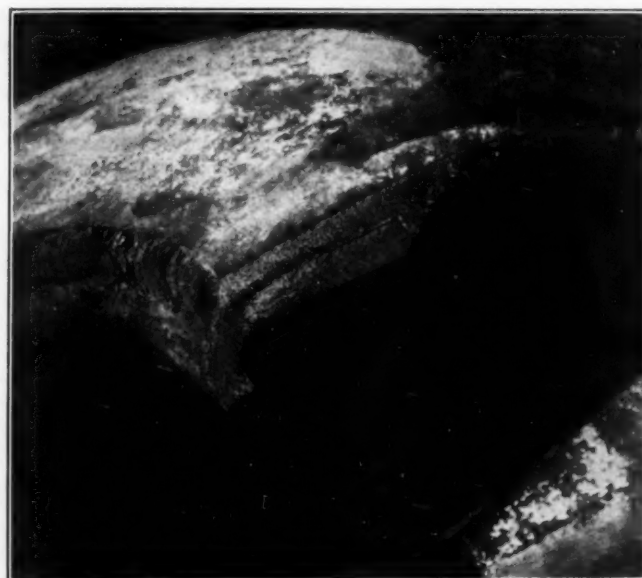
FRACTURE THROUGH SADDLE PLATE AND HEAD
